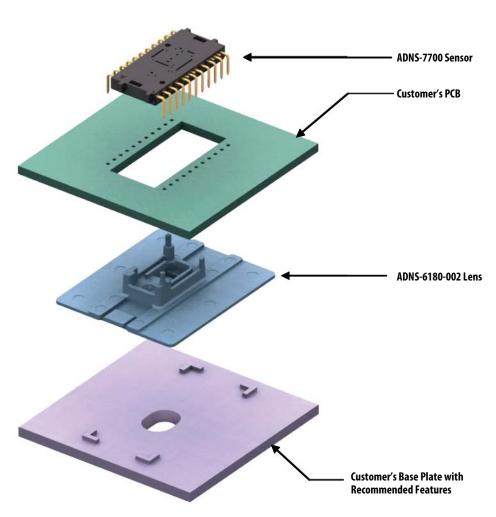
Exploded view drawing of ADNS-7700 sensor coupled with ADNS-6180-002 lens, PCB & base plate
